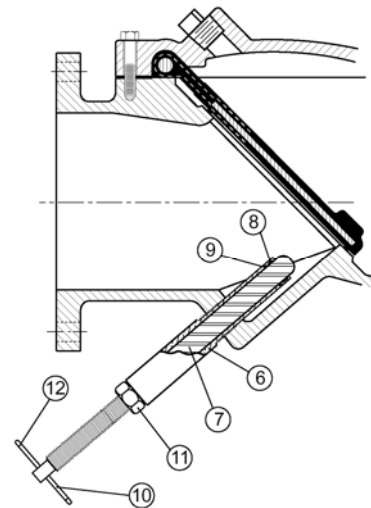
BACKFLOW ACTUATOR ASSEMBLY
